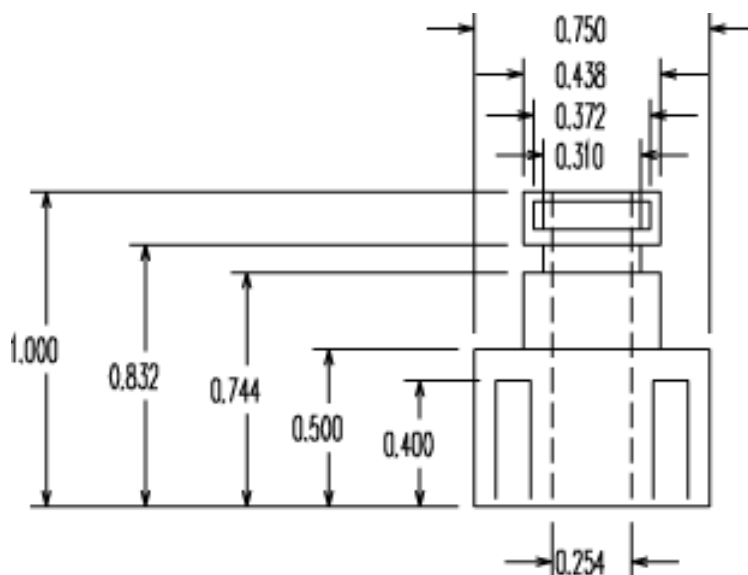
Machining dimensions for the bottom poly(chlorotrifluoroethylene) cap. All dimensions are in inches.
